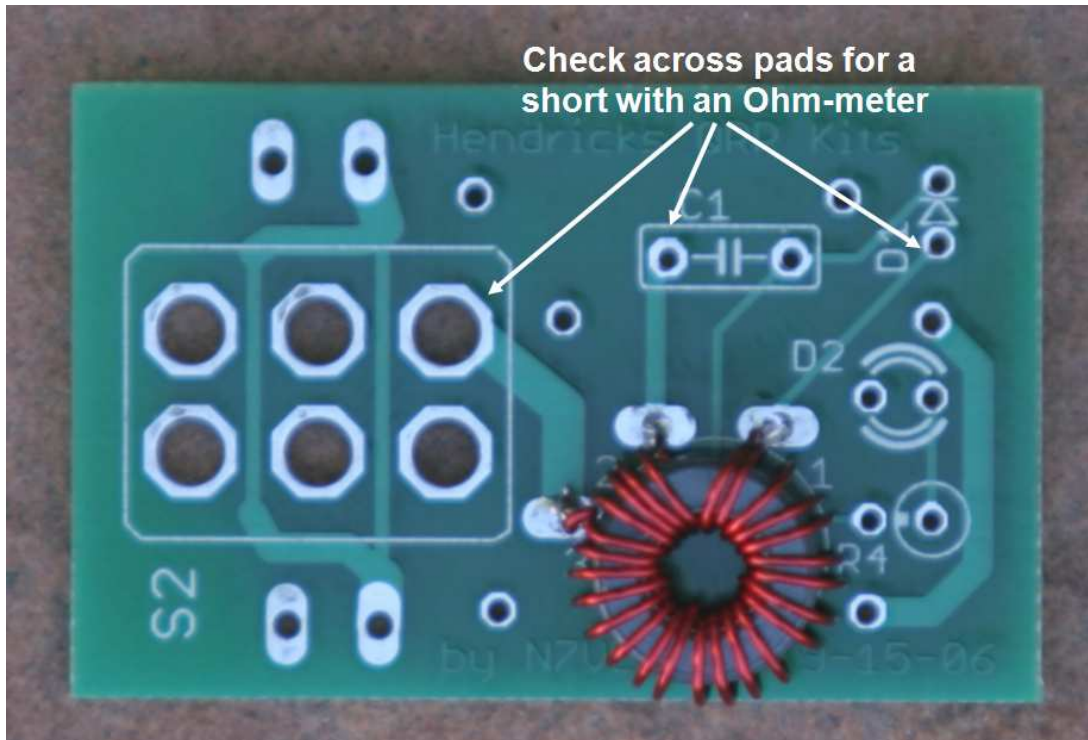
Double check after mounting that the inductor is mounted properly. These pads must be shorted!
